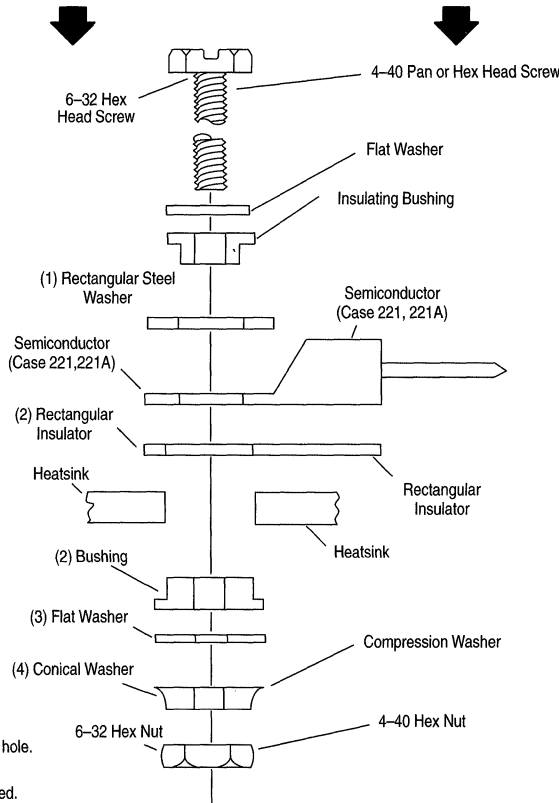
Mounting Arrangements for Tab Mount TO-220
